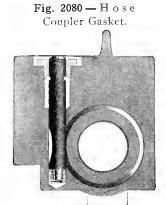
Cross Section Showing Hose Coupler Gasket Locked in Place by Retaining Bolt.
